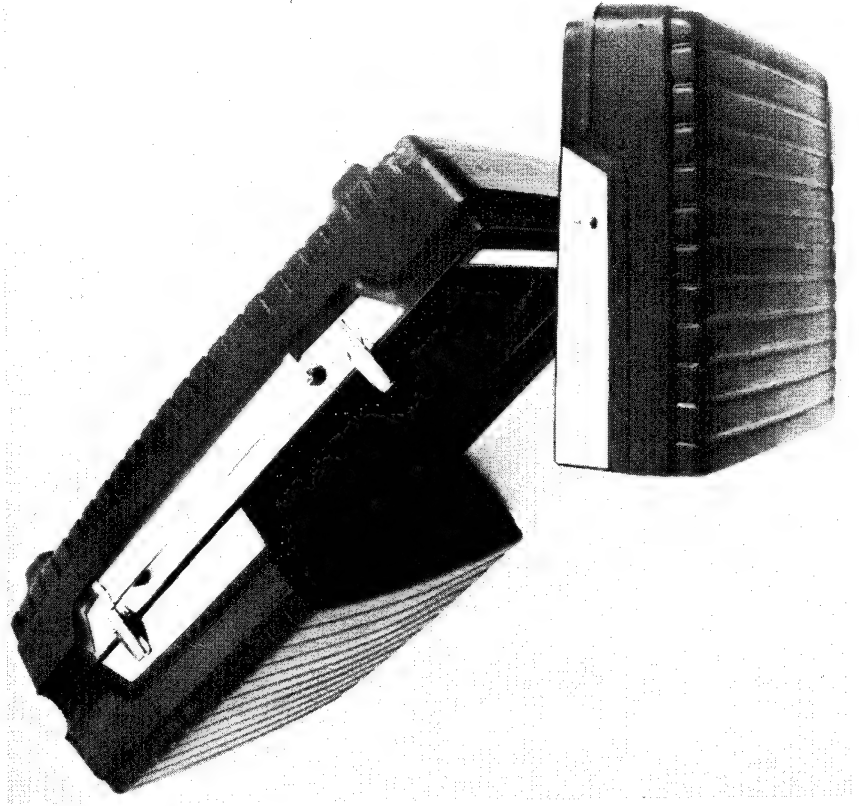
Three piece stereo cabinet molded by Moll Tool and Plastics Corp. for Arvin Industries
